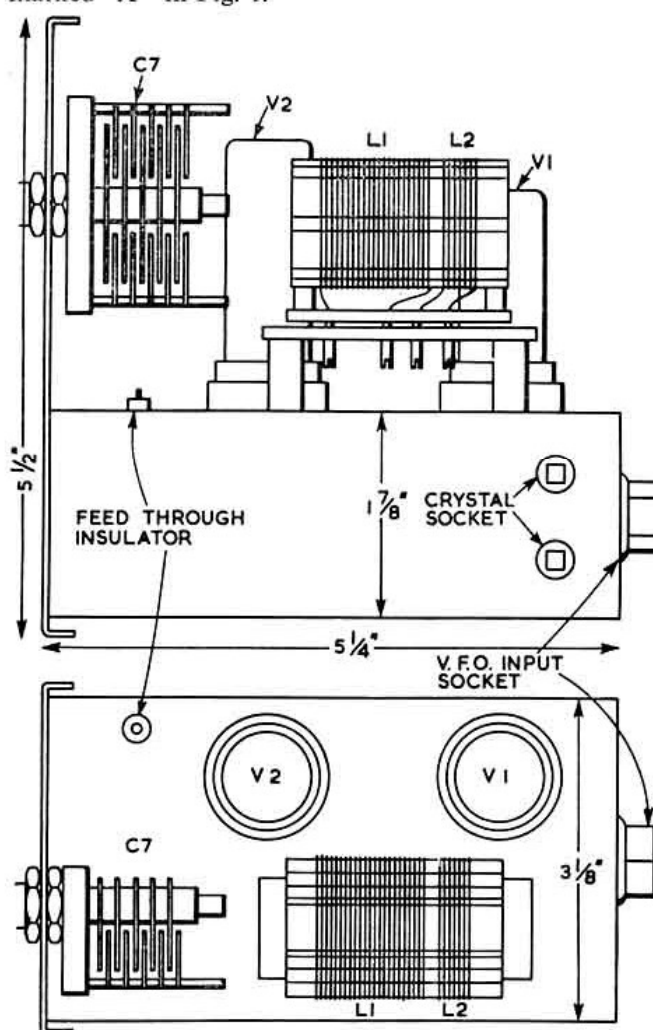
Suggested Layout of Chassis. (a) Side Elevation. (b) Plan.
